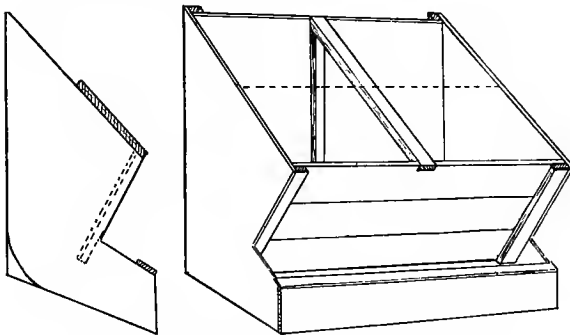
A HOPPER-TROUGH FOR DRY MASH
